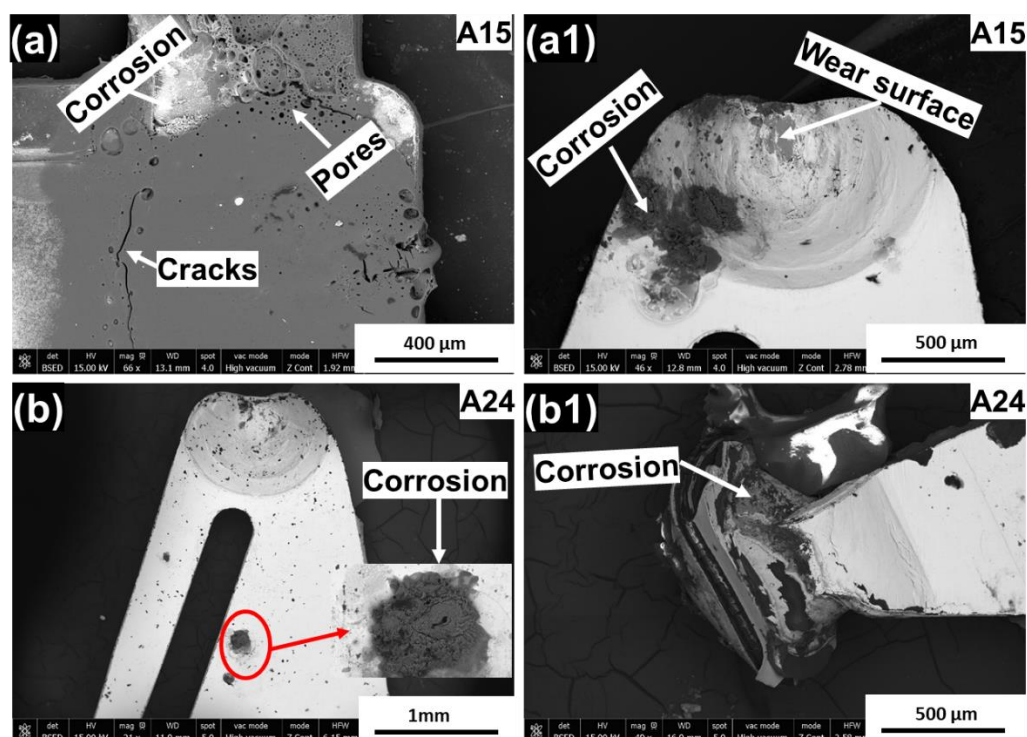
BSED images of Type 1 and Type 2 HA's showing: (a) Conformal coating degradation at W-link coil soldering, (a1,b) Corrosion of battery contact surface, (b1) corrosion on battery contact soldering leg.
